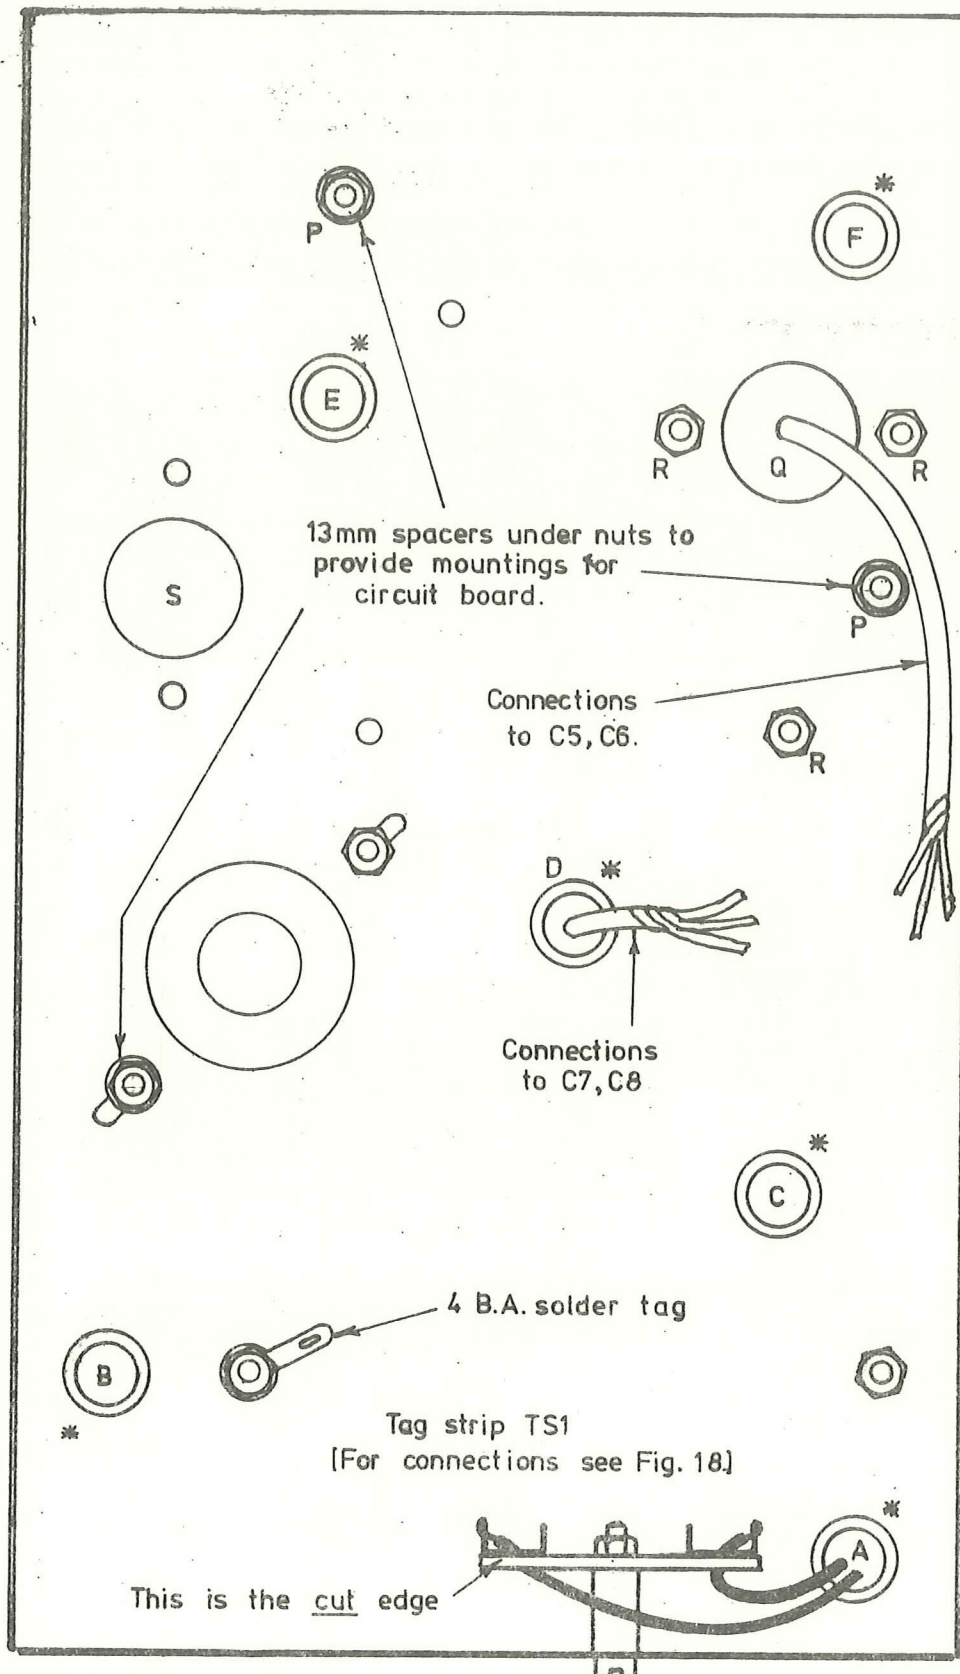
ASSEMBLY OF COMPONENTS ON TOP OF CHASSIS.
